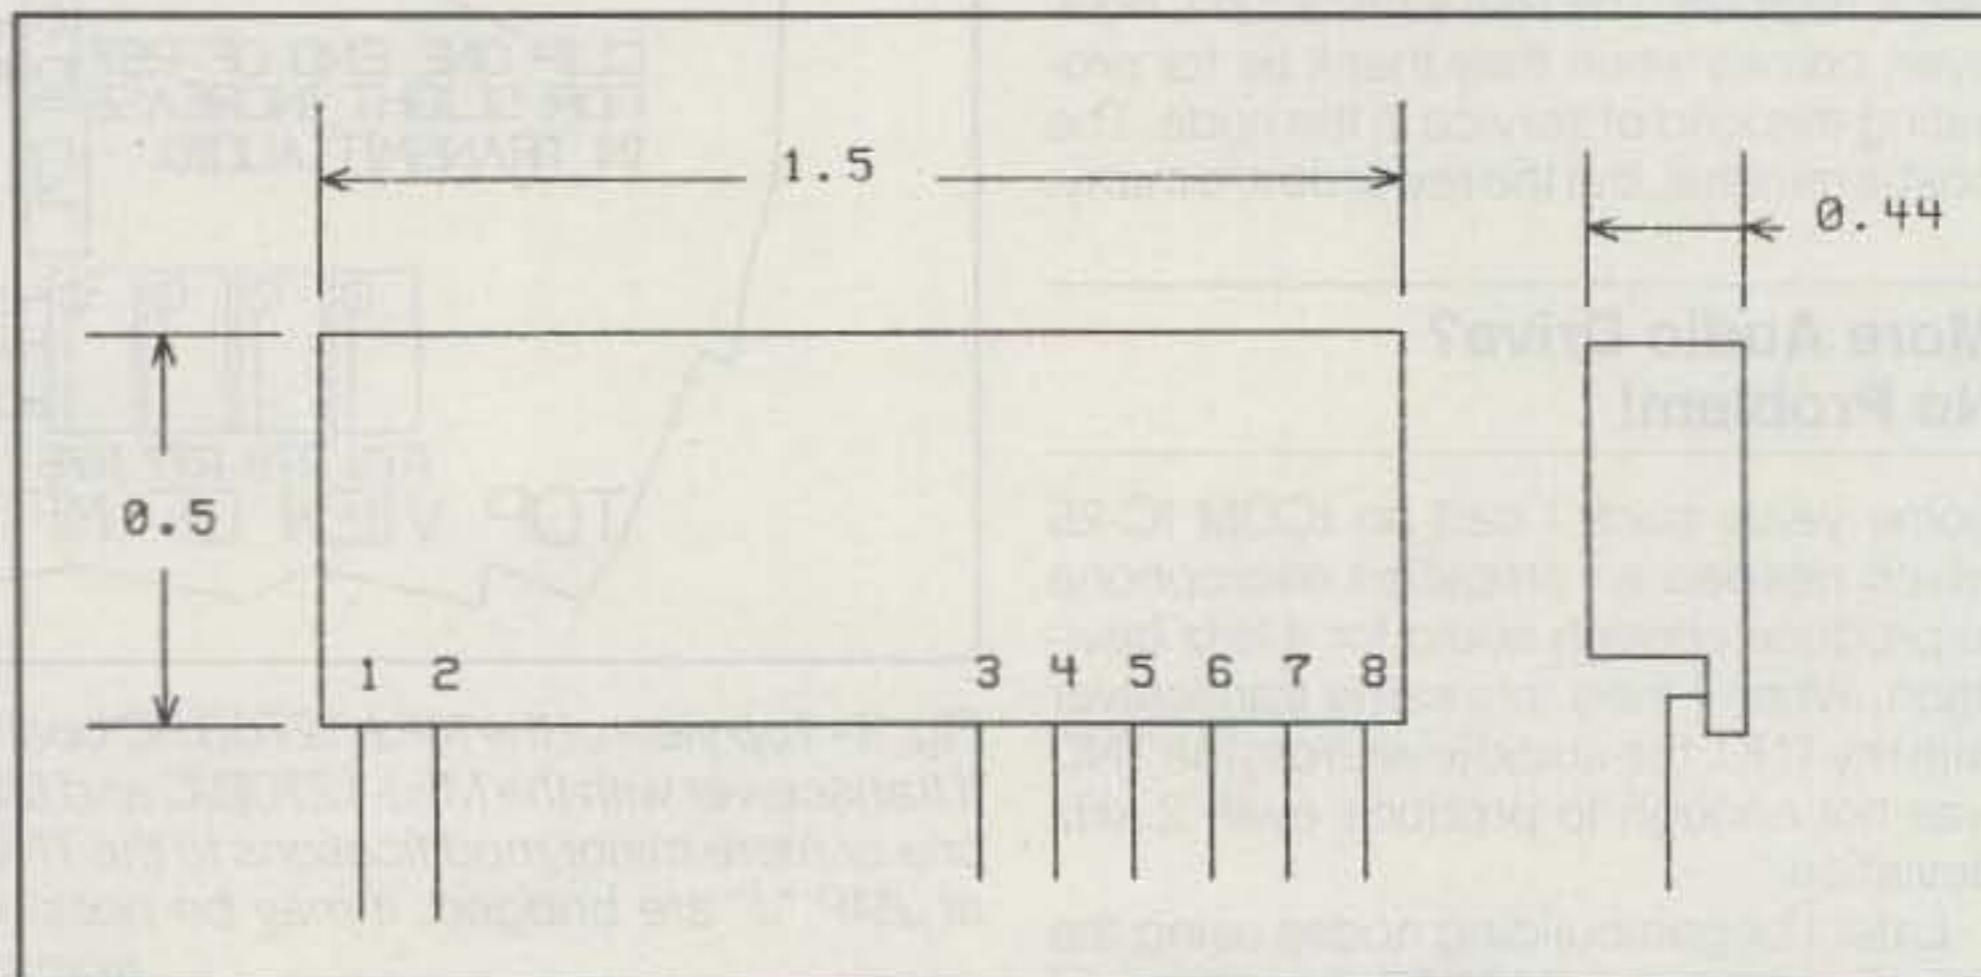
Physical dimensions of XECOM XE0052SIP.
